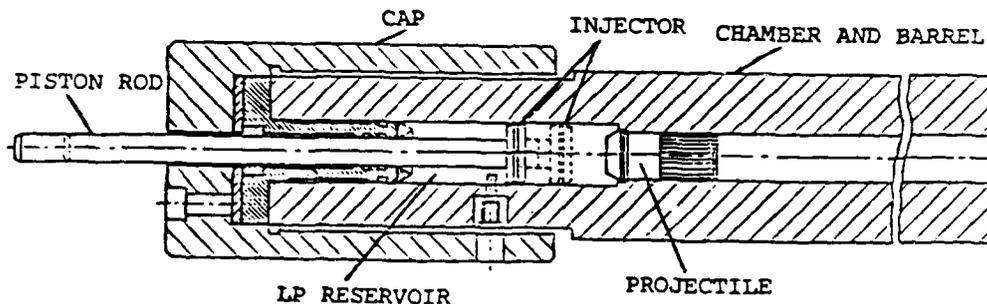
Schematic of Caliber 28-mm Regenerative Test Fixture
